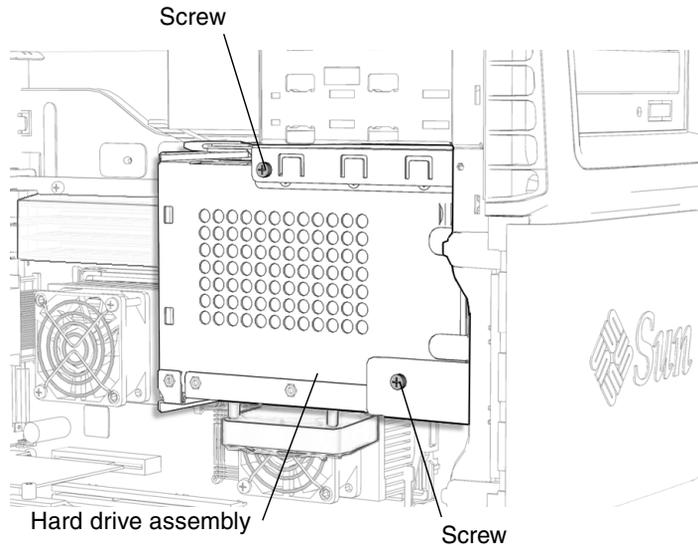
Installing the Hard Drive Assembly Screws
